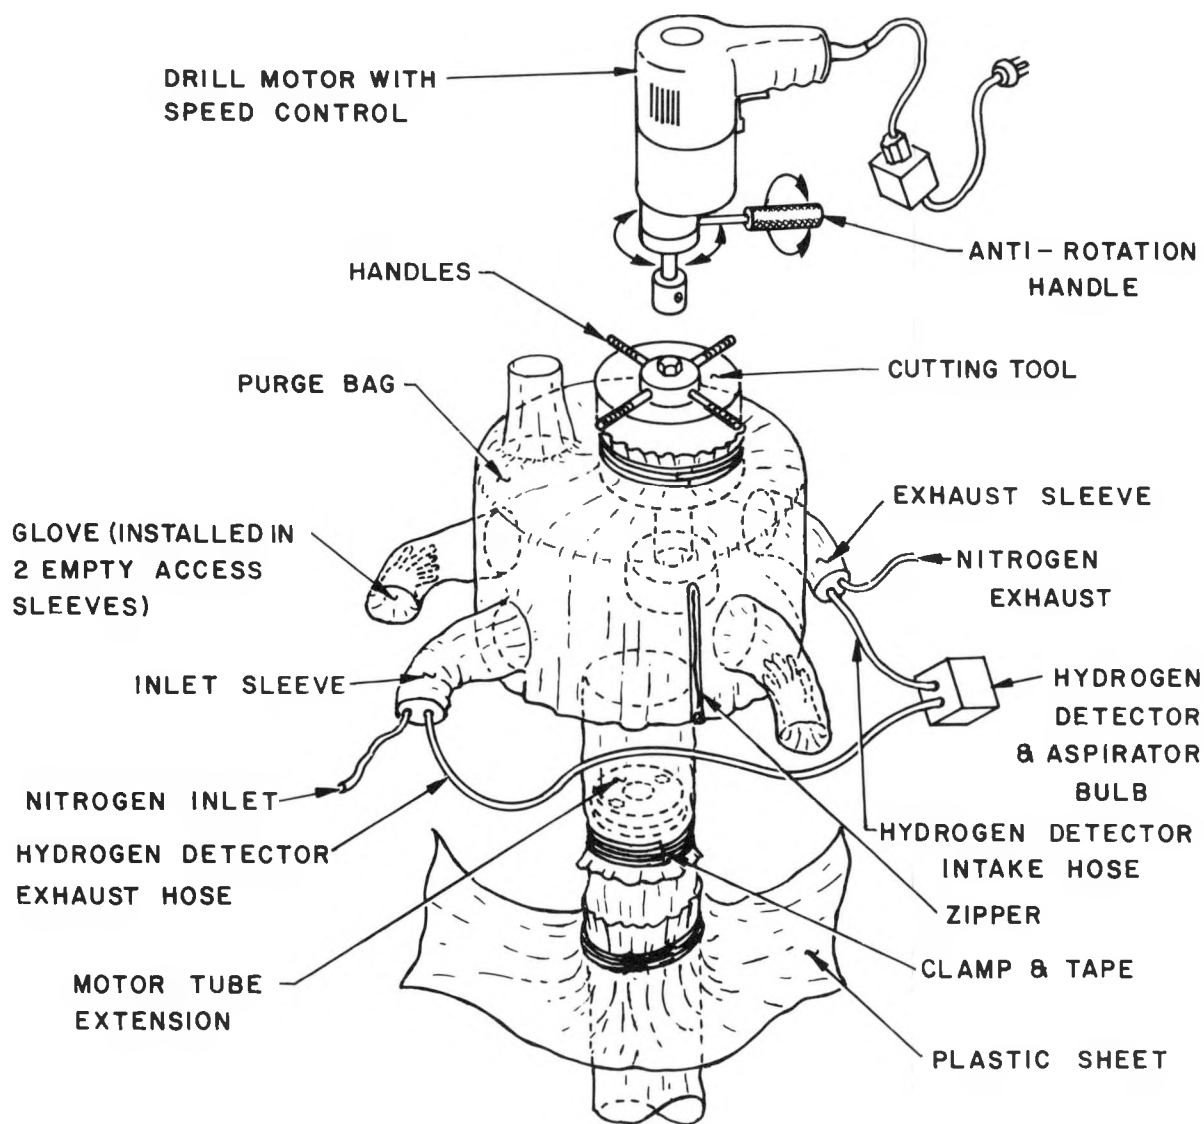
Containment for Motor Tube Vent Valve Plug Weld Cutting
